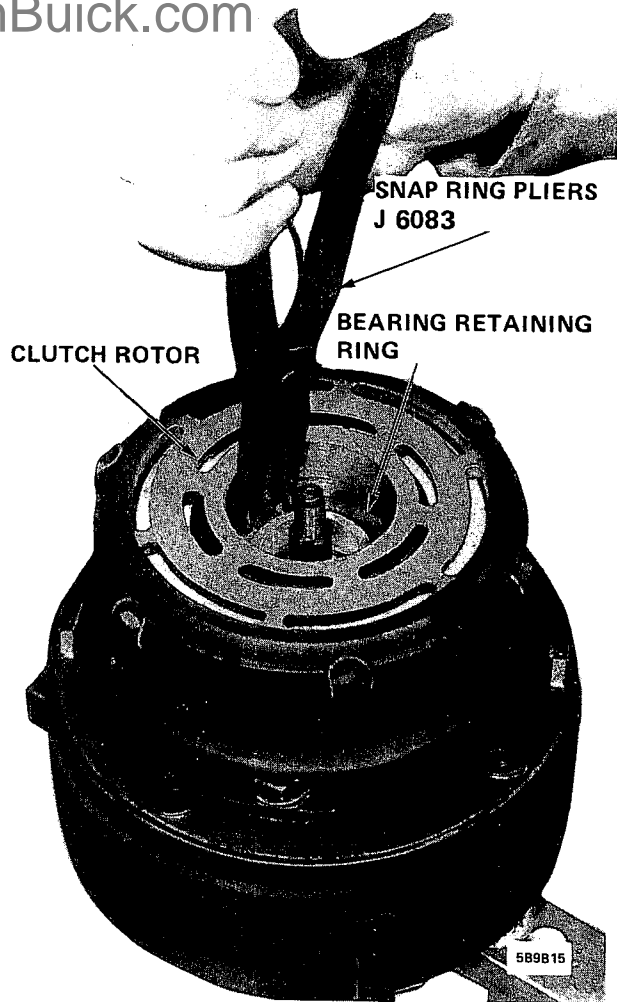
B-38 - Removing Rotor and Bearing Assembly Retaining Ring - 4 Cylinder Compressor
